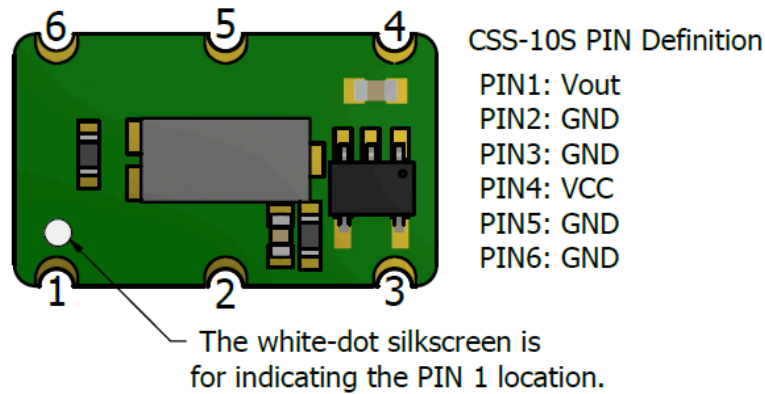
Assembly Guide of CSS-10S (Unit: mm)
